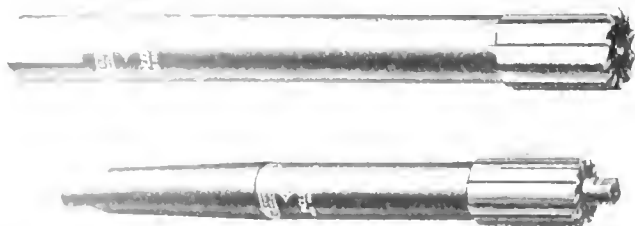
Solid Roughing Reamer with Brazed Blades of High-speed Steel.
